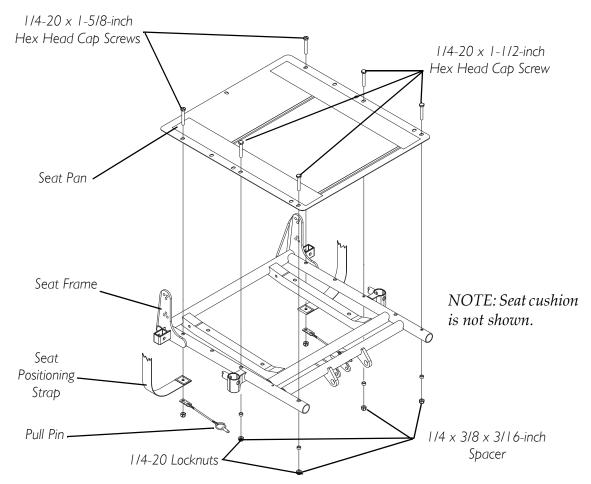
REMOVING/INSTALLING SEAT PAN
